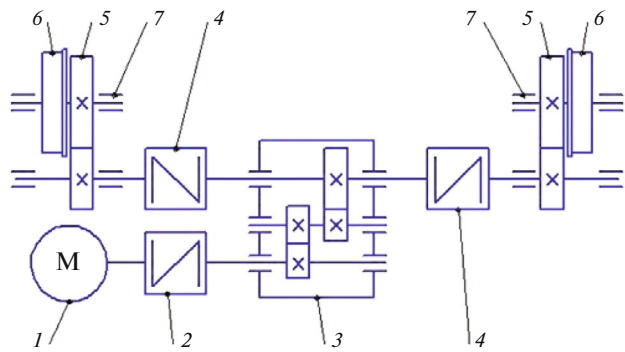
Kinematic diagram of the drive for the mechanism moving the screens: (1) electric motor; (2) coupling; (3) cylindrical gear; (4) coupling; (5) open gear system; (6) drive wheels; (7) bearings.
